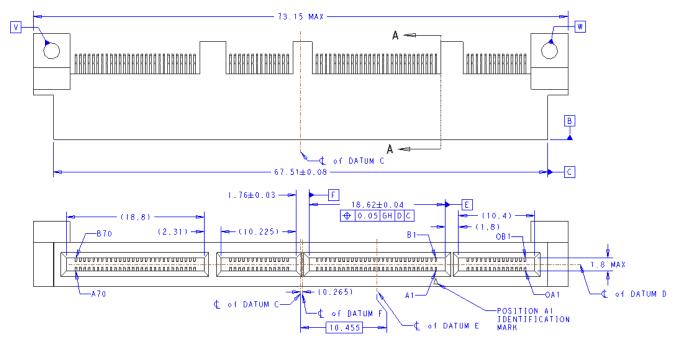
4C+ STRADDLE MOUNT CONNECTOR DIMENSIONS - FRONT VIEW (MM)
